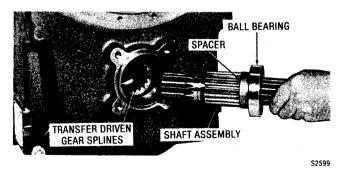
Removing rear output shaft assembly (-1 models with output disconnect)
